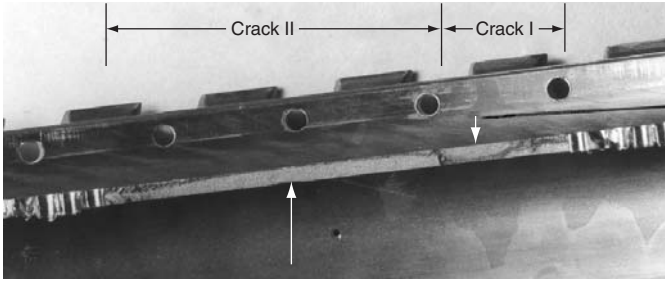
Fracture surface opened up for investigation, showing two fatigue cracks initiating on opposite sides of the disc diaphragm
